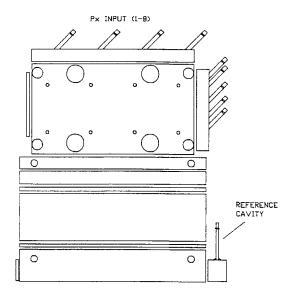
shows a typical True Differential Valve Block Assembly and the location of the pneumatic inputs.
